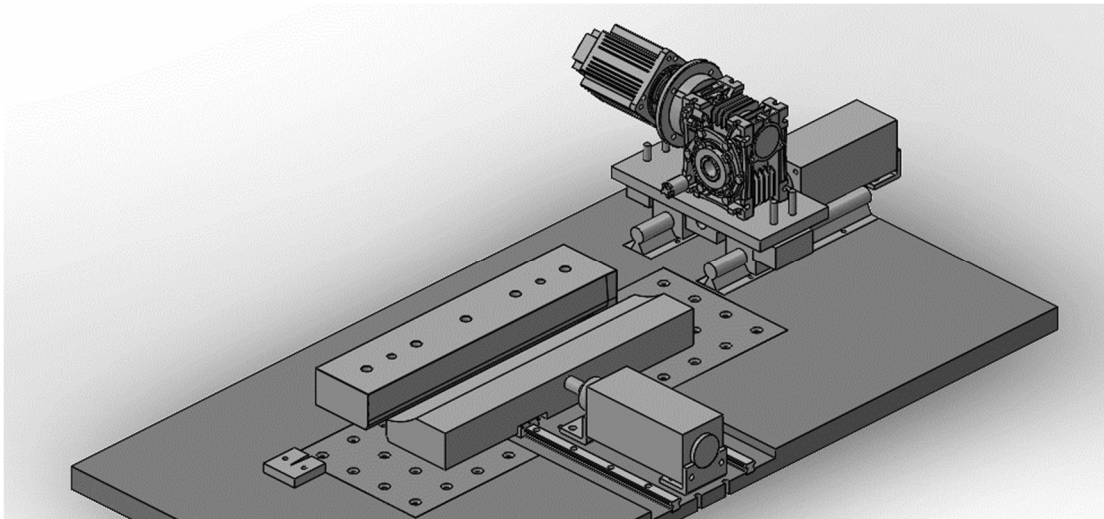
Design of Folding Tail Fin Deployment Test Fixture
